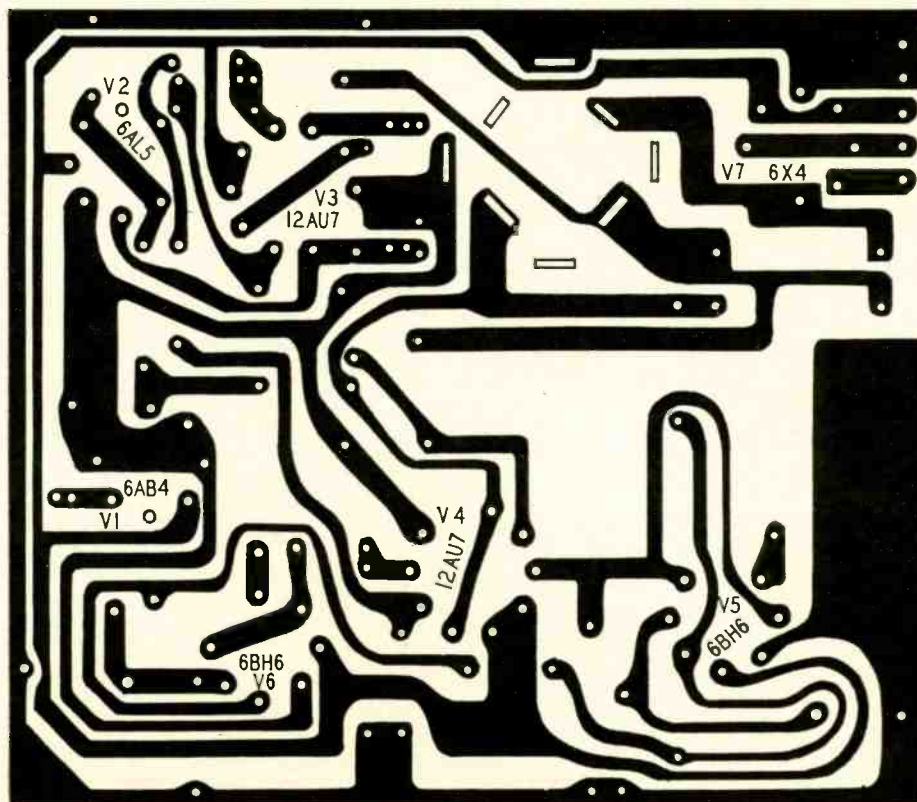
Full-size reproduction of the wiring board. It may be photographed to produce the printed circuit. (See text).
